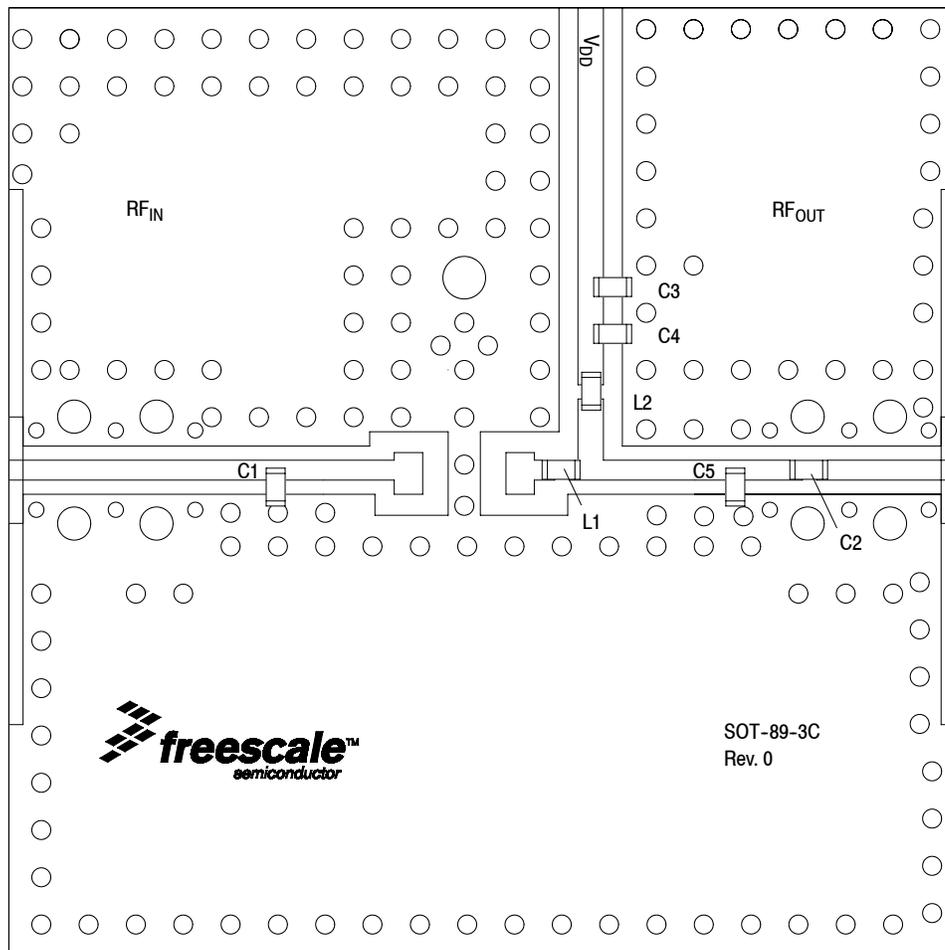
MMG20271H9T1 Test Circuit Component Layout
